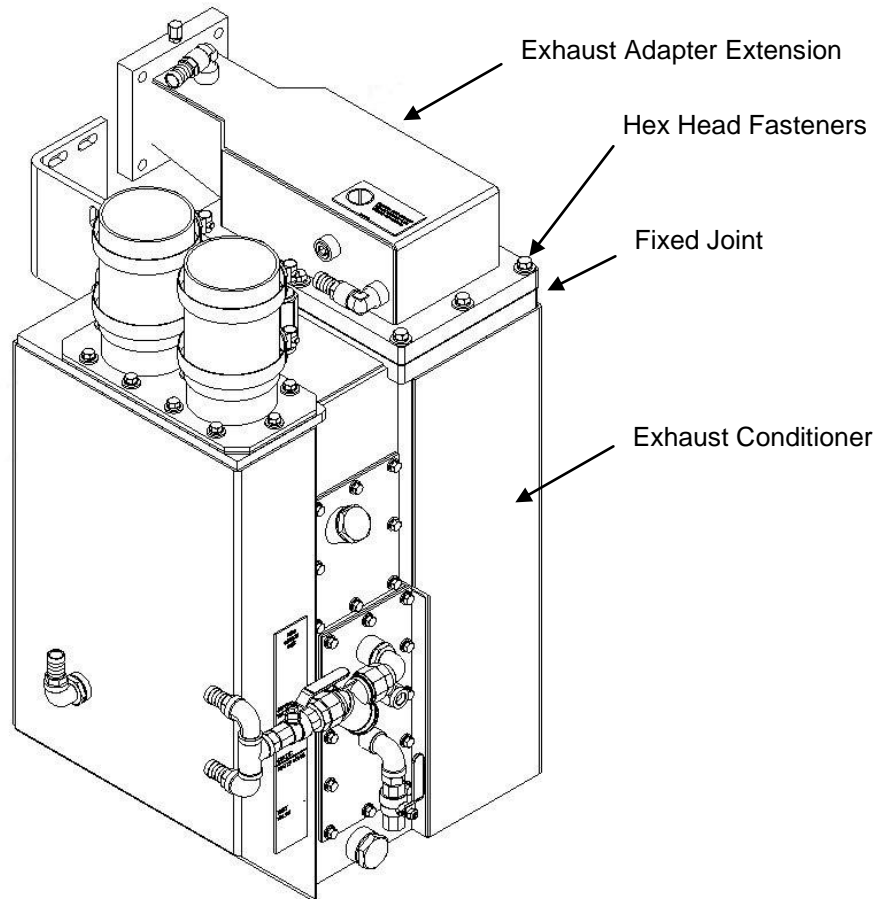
MDR090376DES Exhaust Conditioner Assembly
